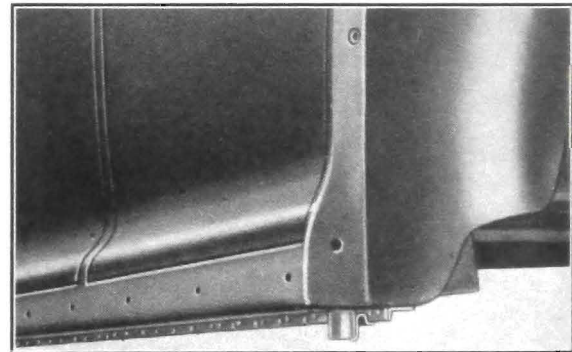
Showing location of drain hose outlet at lower rear quarter section of body.
